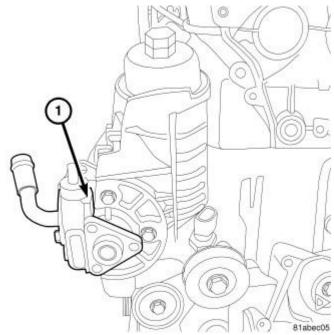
Power Steering Pump Courtesy of CHRYSLER LLC
